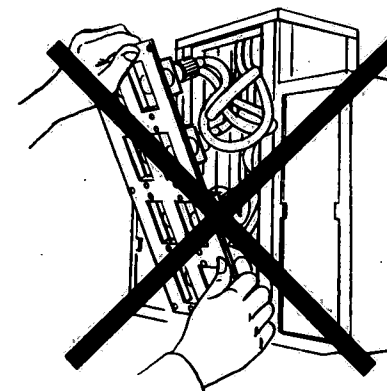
Incorrect Reinstallation of Gas Outlet Assembly - Lines Likely to Kink
